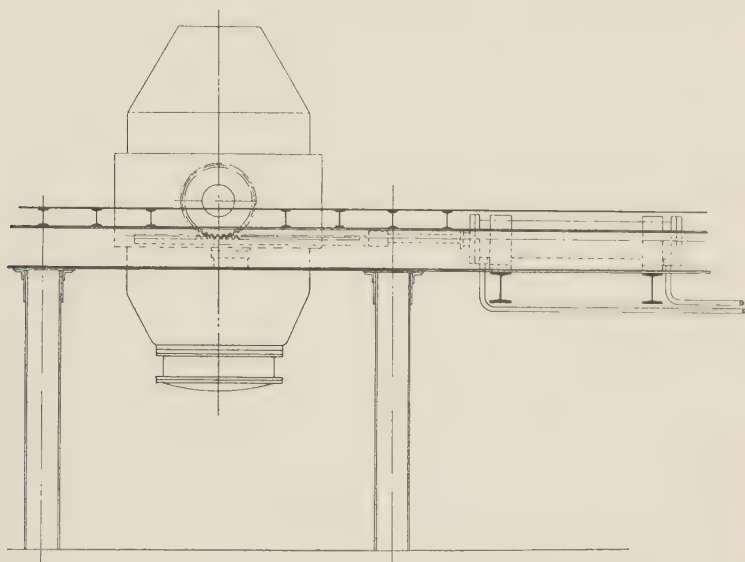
One method of Tilting Converter, with Hydraulic Ram arranged horizontally.
